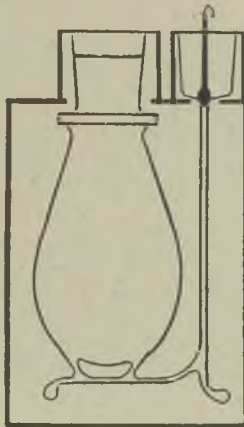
ILLUSTRATING METHOD OF POURING AND "FEEDING" PROPELLER BLADE.
